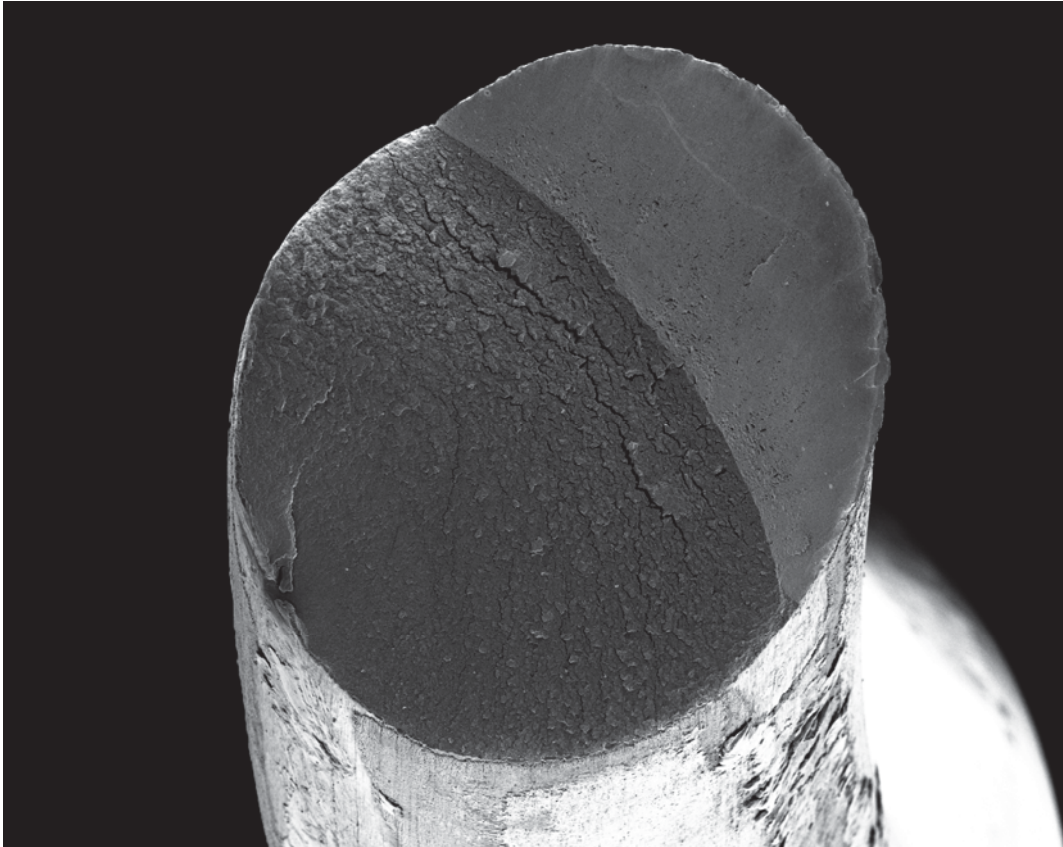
Fatigue crack in another internal wire. The fatigue crack started at the lower left hand side. After weakening the wire by about two-thirds the wire finally failed in shear (approximate magnification $\times 29$).
